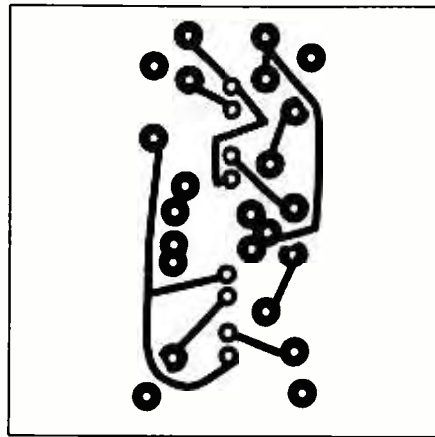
Actual-size etching-and-drilling guide for project's printed-circuit board.
